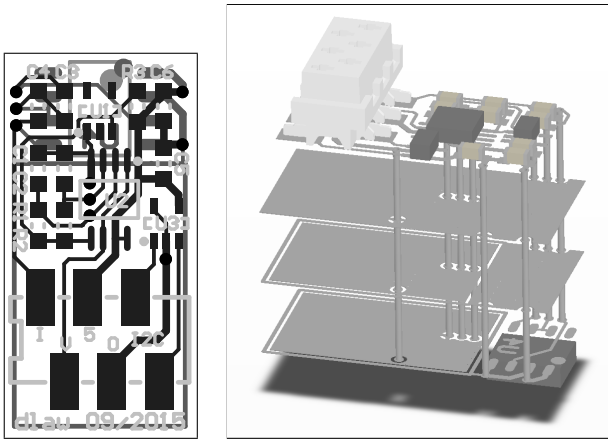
2D and 3D exploded views of the sensor PCB. The board dimensions are 1 cm by 2 cm. From top to bottom, layers contain: (1) connector, instrumentation amplifier, and supporting components, (2) ground plane, (3) sensor plate and ground plane, (4) sensor plate and Hall effect IC.
